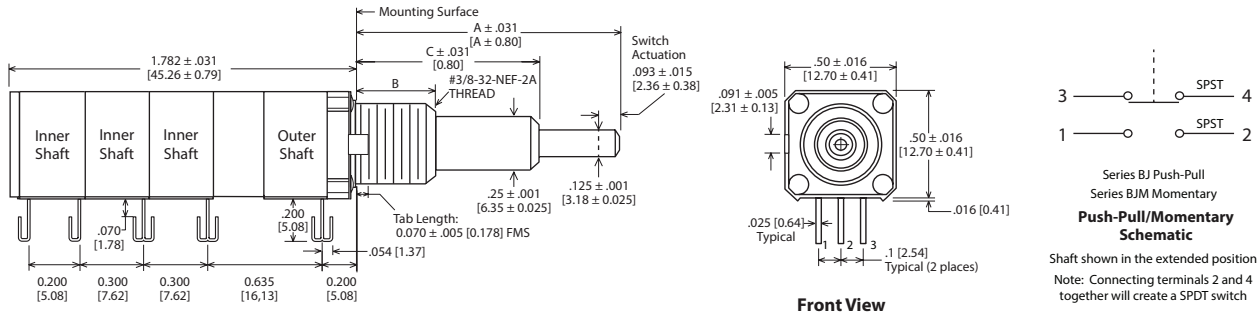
SHA-31: Concentric Shafts, B22, 3 Potentiometer(s) or RS + MP, 1/4" Bushing
